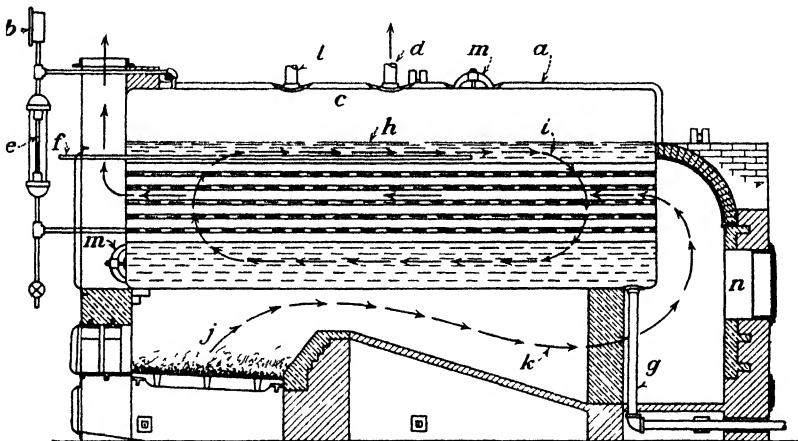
Horizontal return tubular (fire-tube) boiler.
